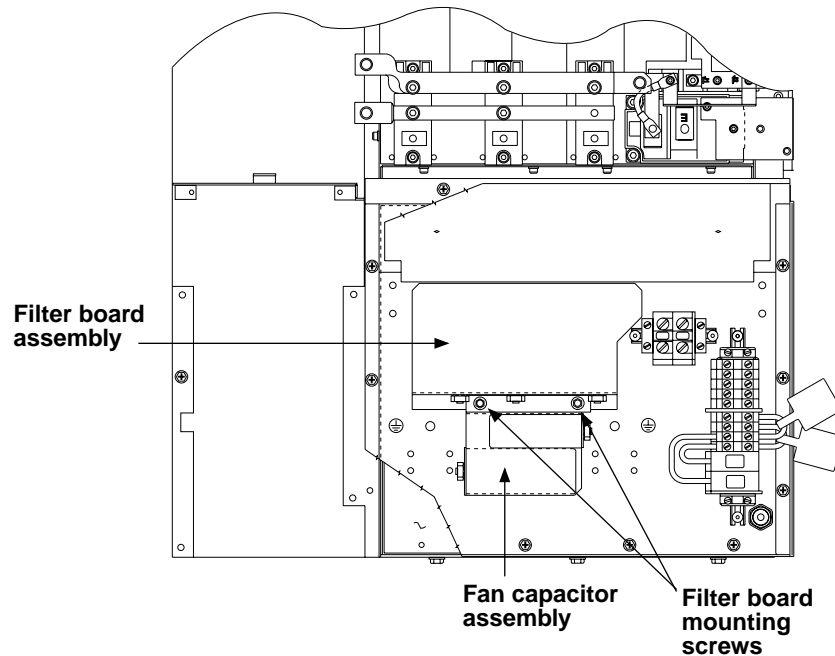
Filter Board and Fan Capacitor Assembly Locations
